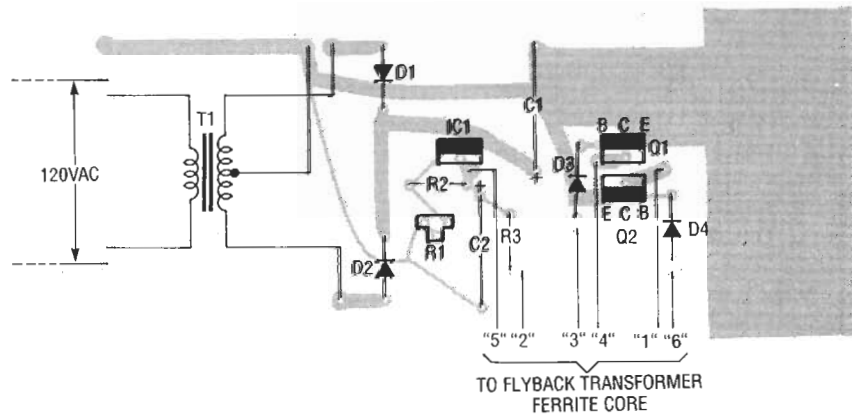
THE PARTS-PLACEMENT DIAGRAM for the main PC board; Q1, Q2, and IC1 have U-shaped 1×1-inch copper heatsinks, with silicone grease for heat transfer; each goes on the main PC board without insulators. In the prototype, S1, S2, F1, and NE1 were omitted, and T2 was salvaged from a small-screen TV; note the new feedback and bifilar primary windings. Pin 7 had the highest resistance relative to the flyback transformer output lead, so it becomes ground.
